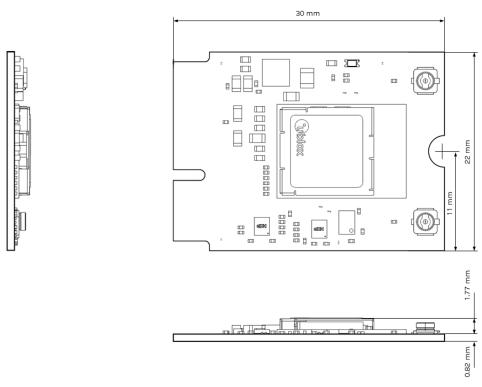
Physical dimensions of the M2-MAYA-W2 card
